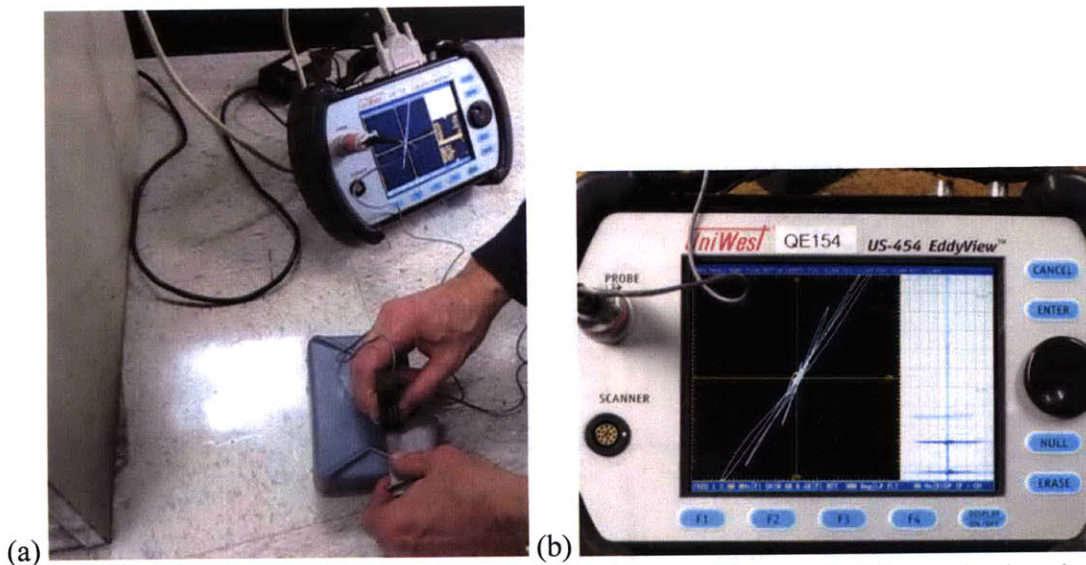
(a-b) Traditional point probe eddy current detected the post weld tip crack when the more advanced 3D-CT method could not. This is an example of when a traditional technique that is better suited to the particular flaw type should be used instead of an advanced technique.
